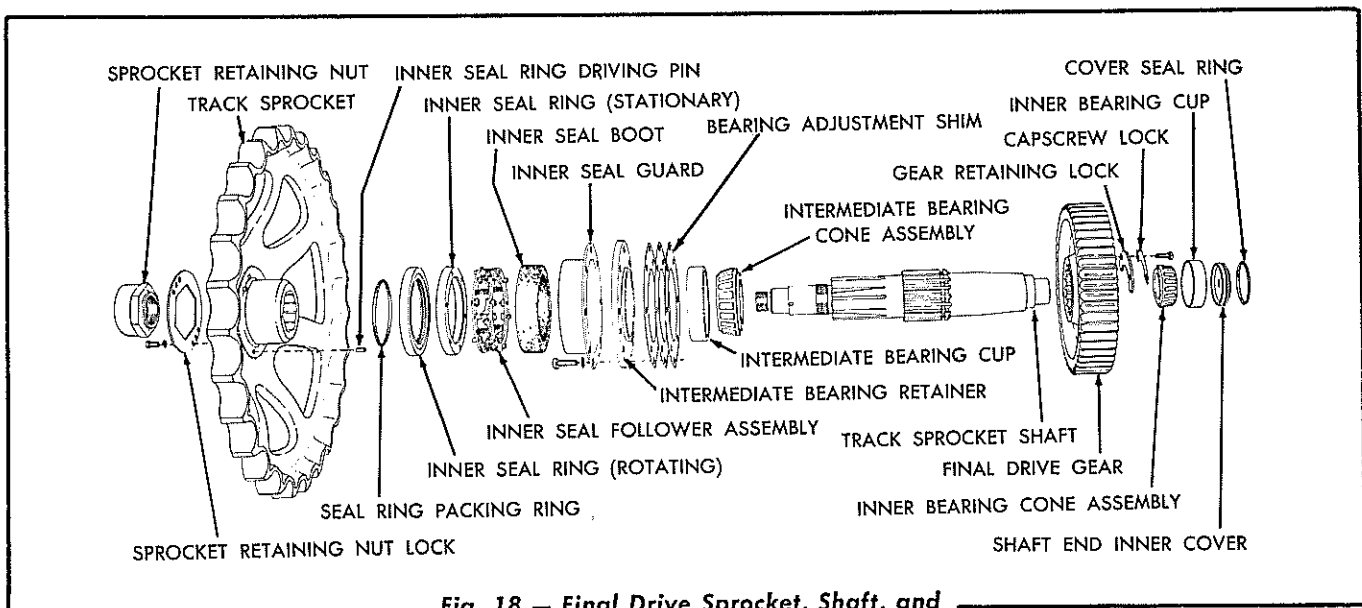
Final Drive Sprocket, Shaft, and Gear Details
